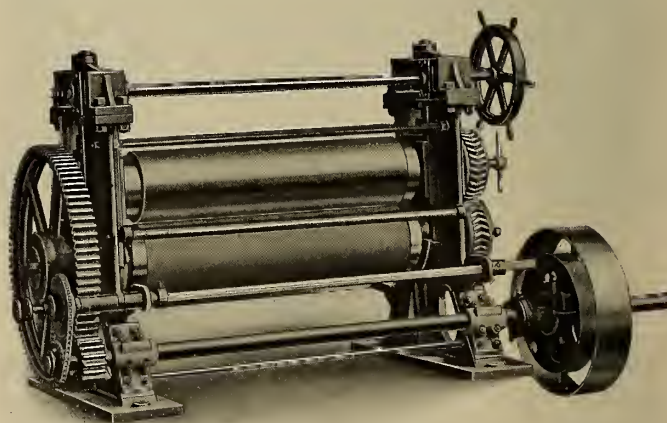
EMBOSSING MACHINE OF THREE ROLLS, THE ENGRAVED ONE IN THE CENTER
